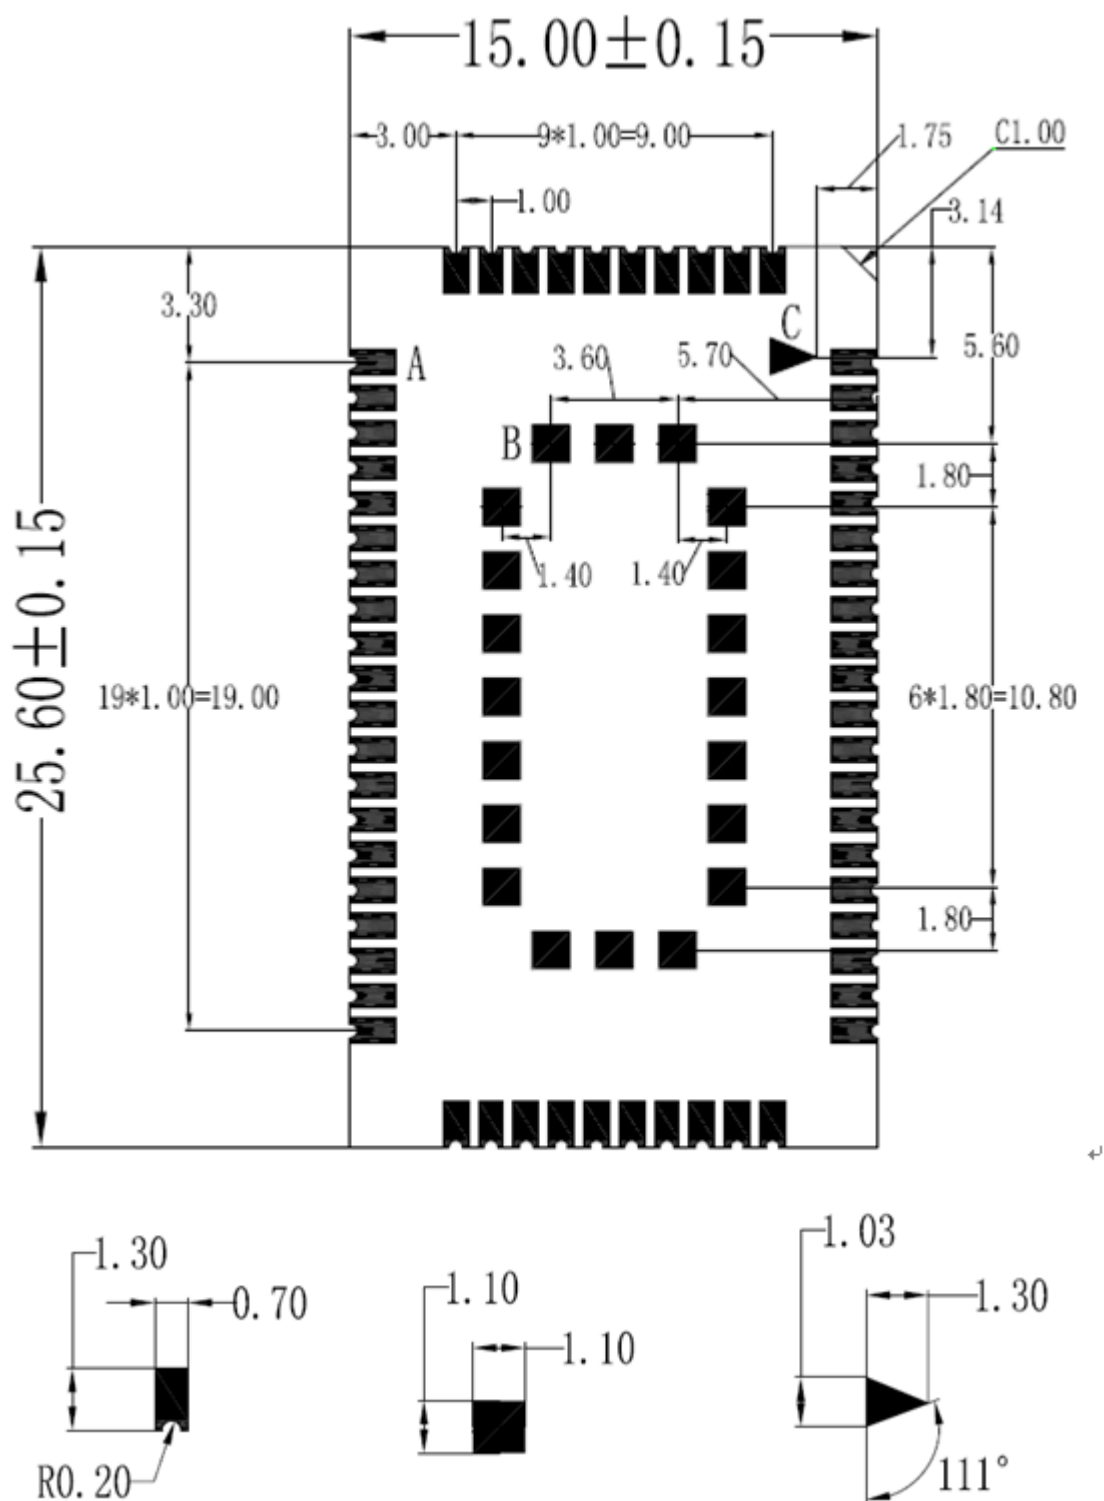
MC90-OpenCPU Bottom Dimensions (Bottom View) (Unit: mm)
